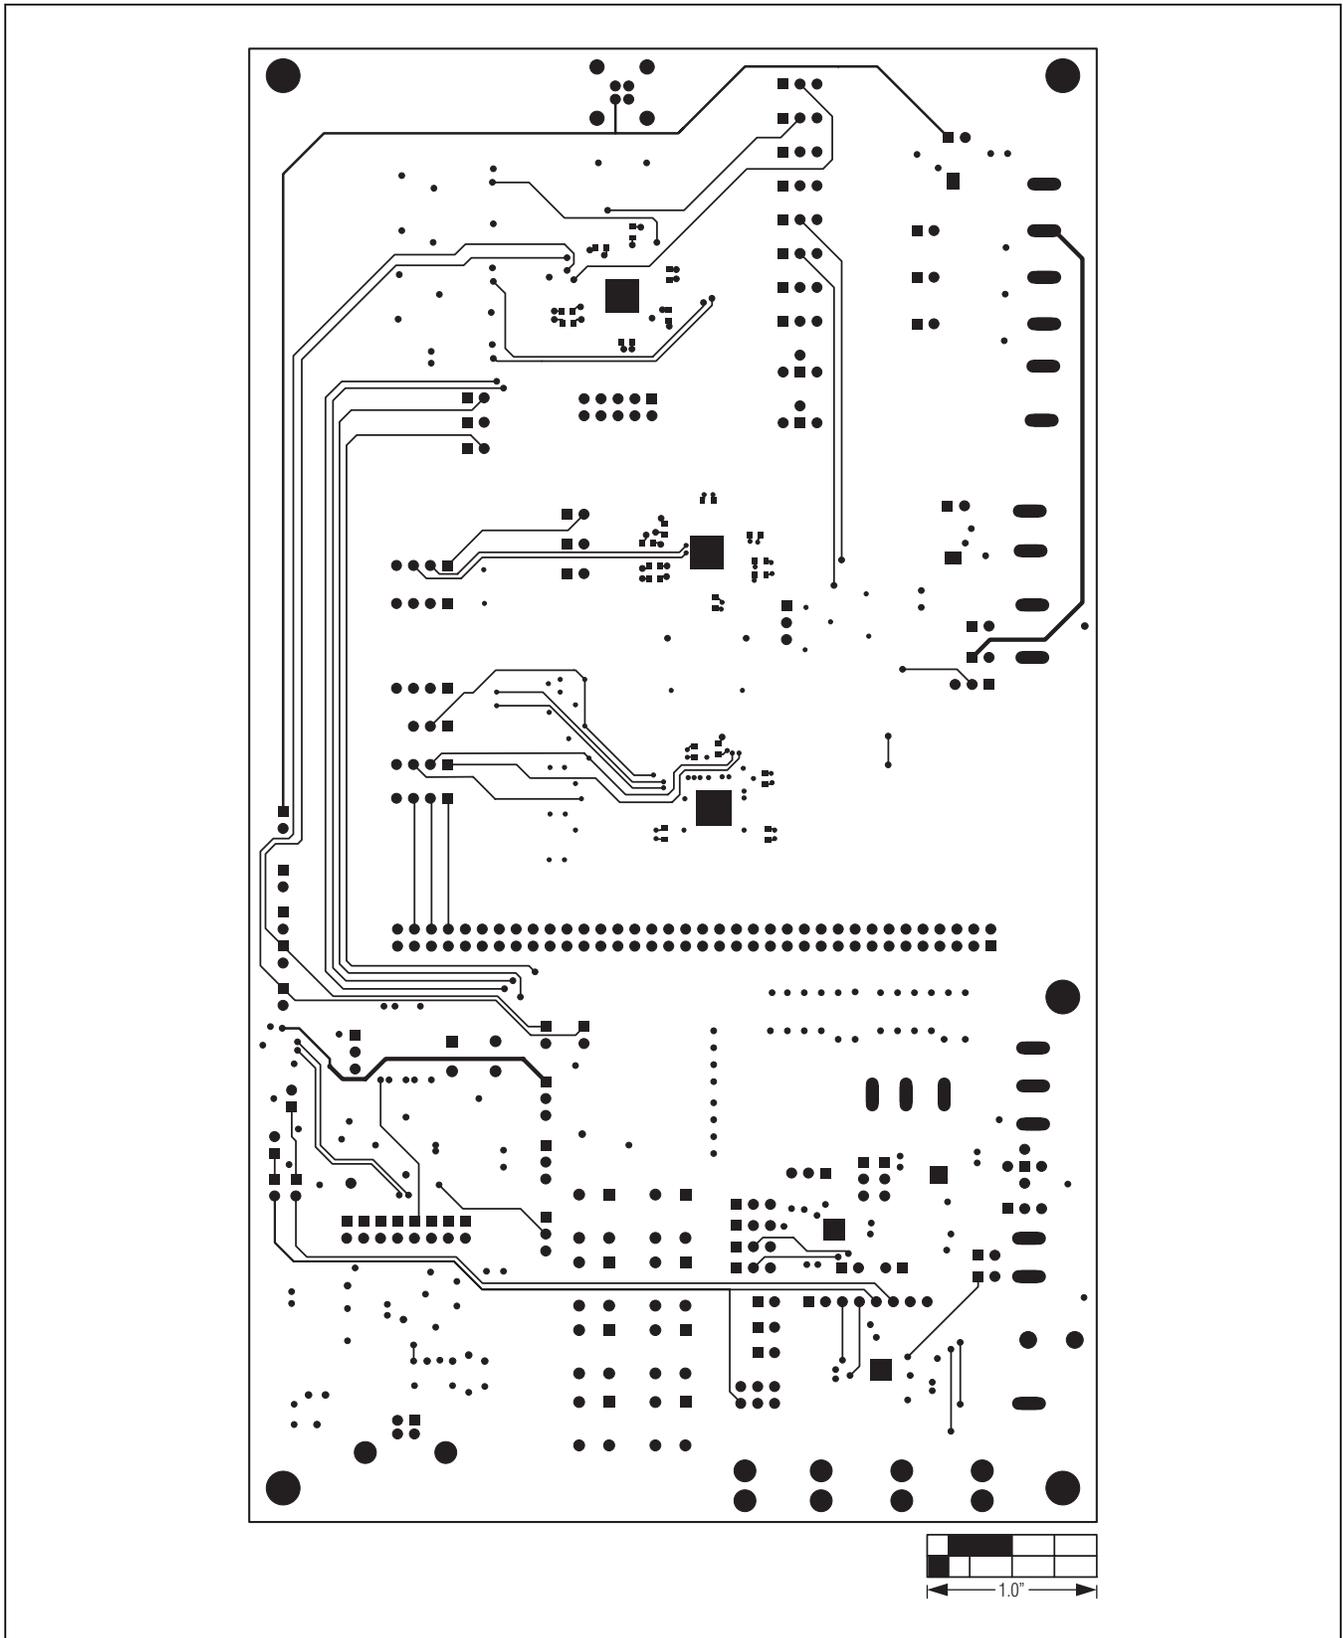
MAX9266 EV Kit PCB Layout—Solder Side
